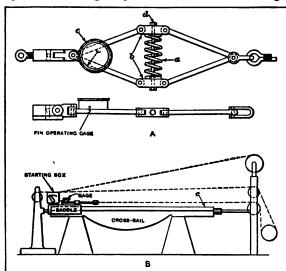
(A) Indicating Mechanism for Pulling Device. (B)
